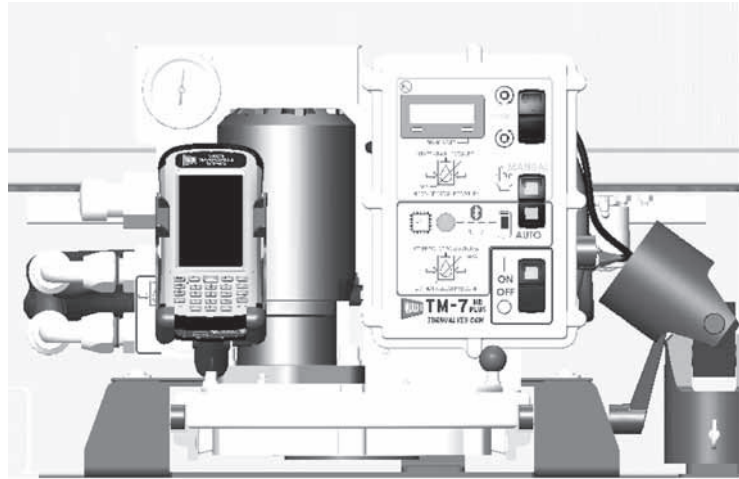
The drawing shows the primary controls of the 17-000-30 TM-7 configuration.
